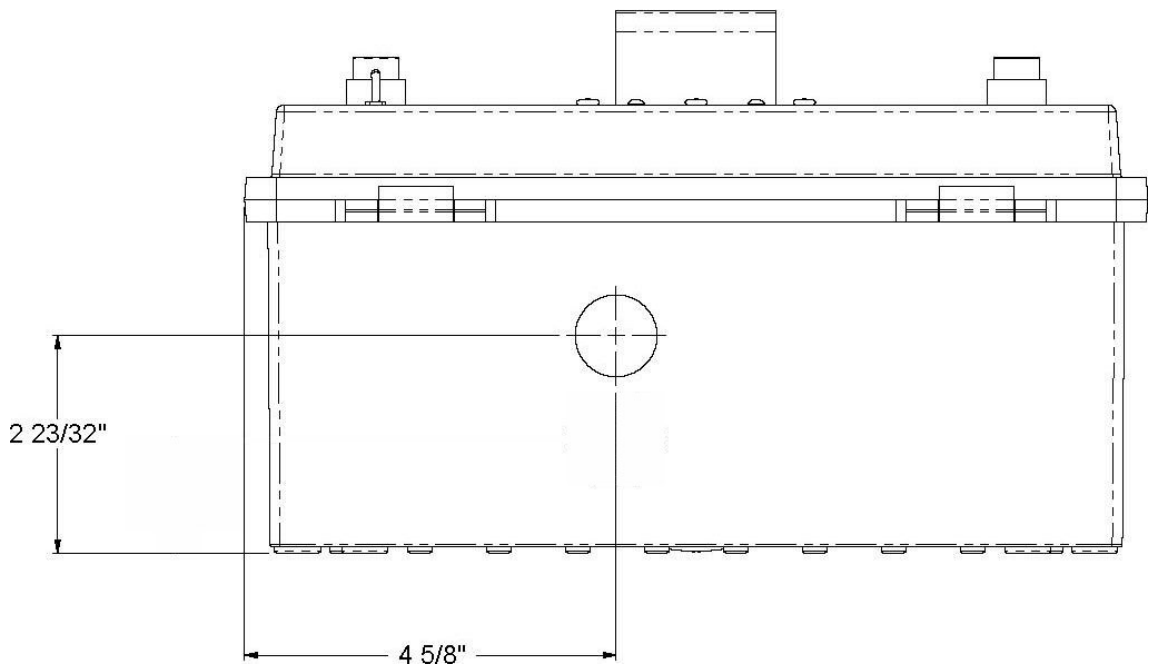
MRU Bottom Cable Penetration Locations (Bottom View)
